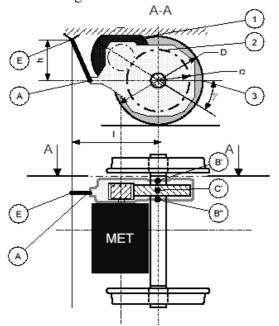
The axle drive system 1 – traction motor (MET); 2 – gear box; 3 – mounted axle.
